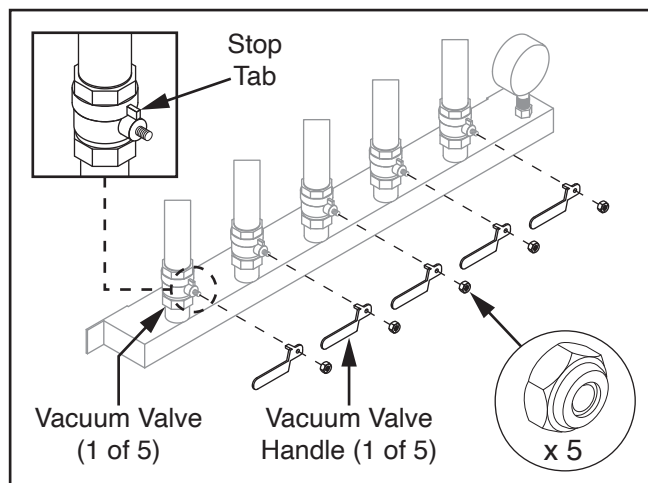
Installing vacuum valve handles (vacuum valve cover removed for clarity).
